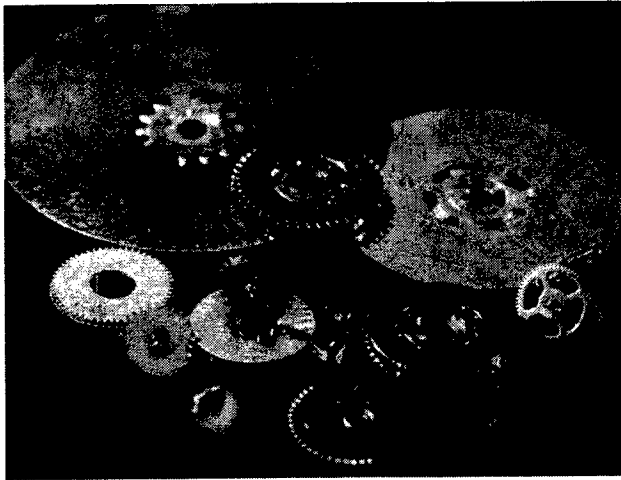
Various watch components welded with SHADOW technique Inserts for sample holder
